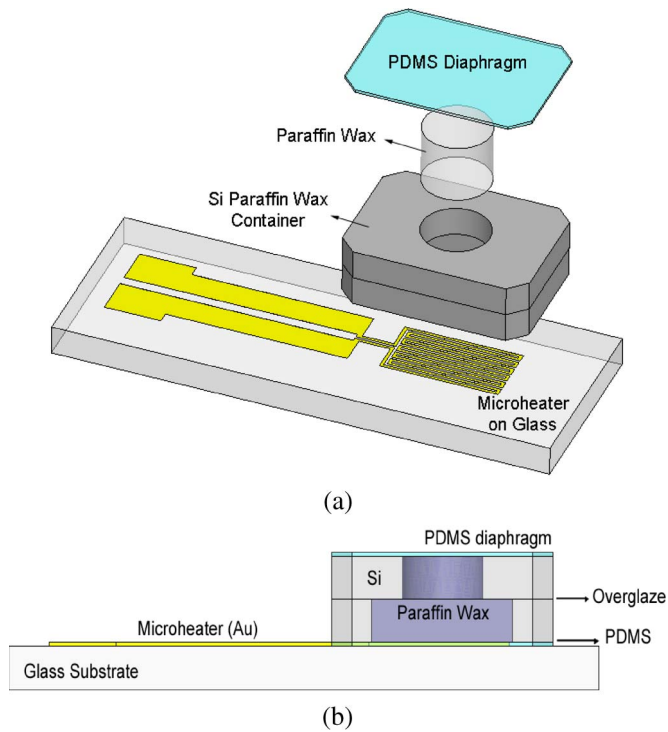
Electrothermal hydraulic microactuator. (a) Exploded view. (b) Cross-sectional view.
